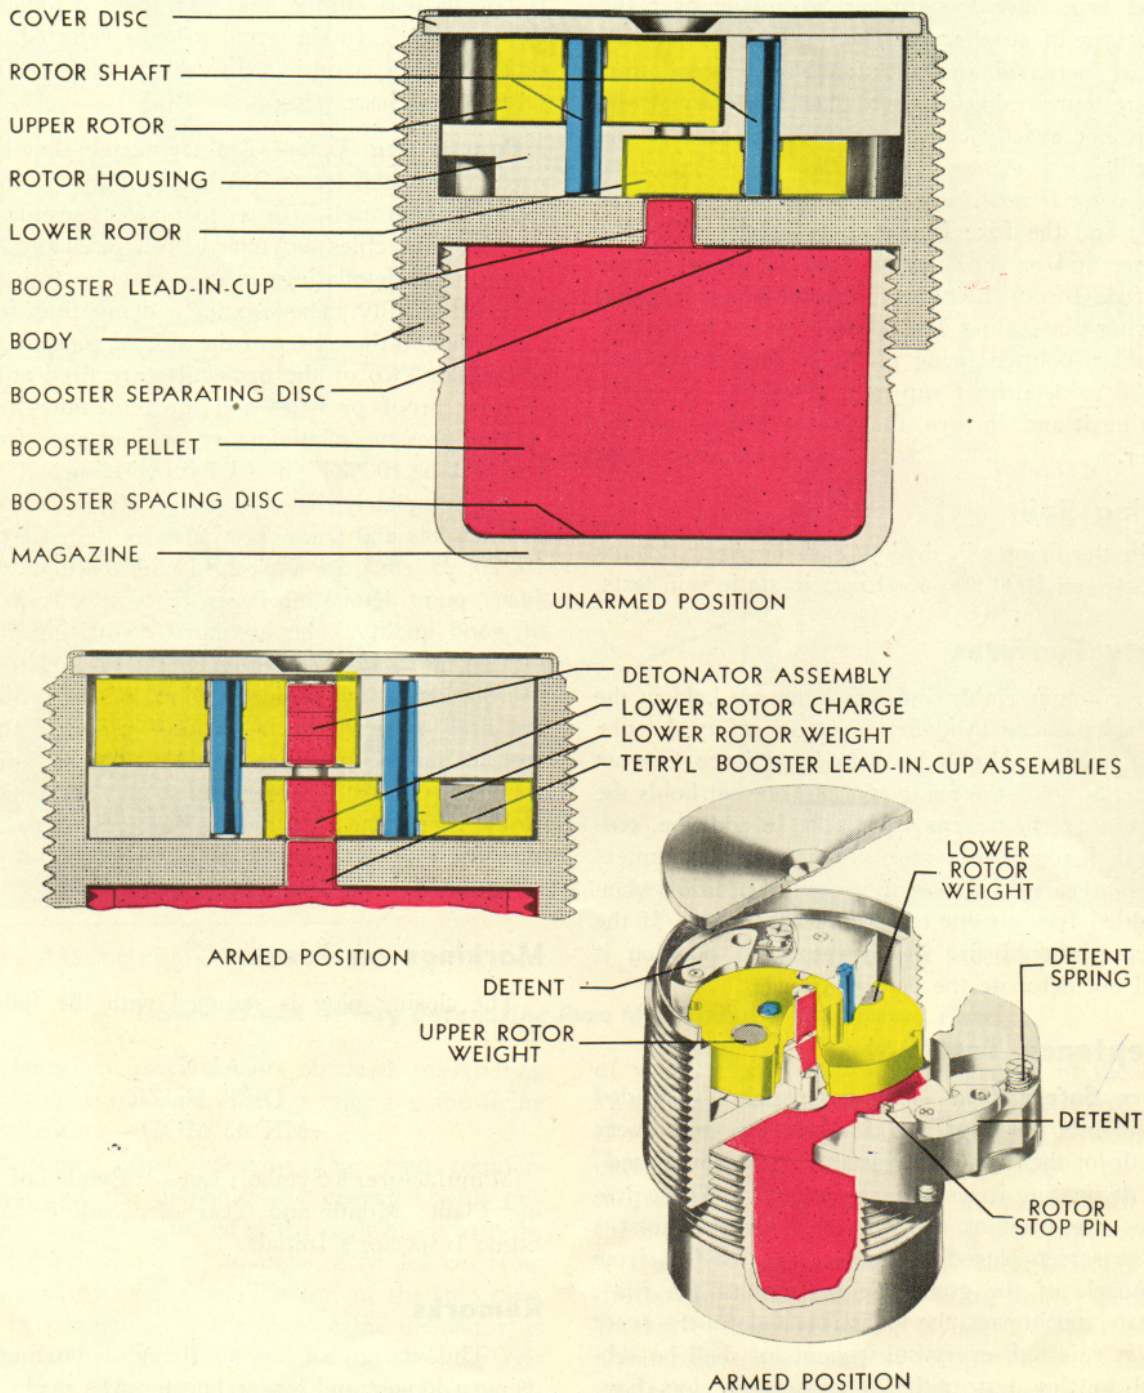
Auxiliary Detonating Fuze Mk 44—Sectional View
